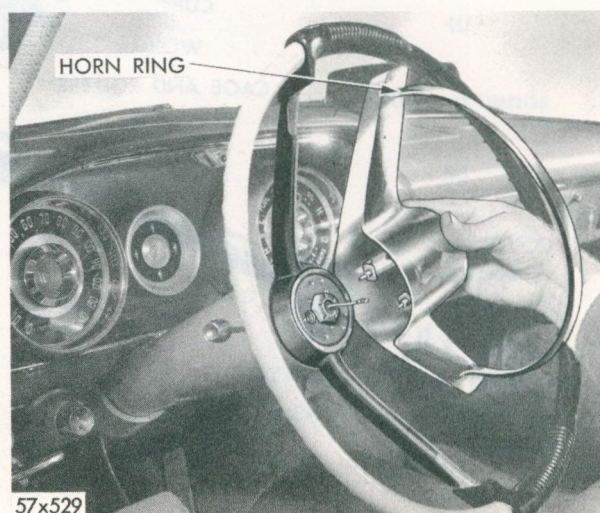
Removing or Installing Steering Wheel Horn Ring
